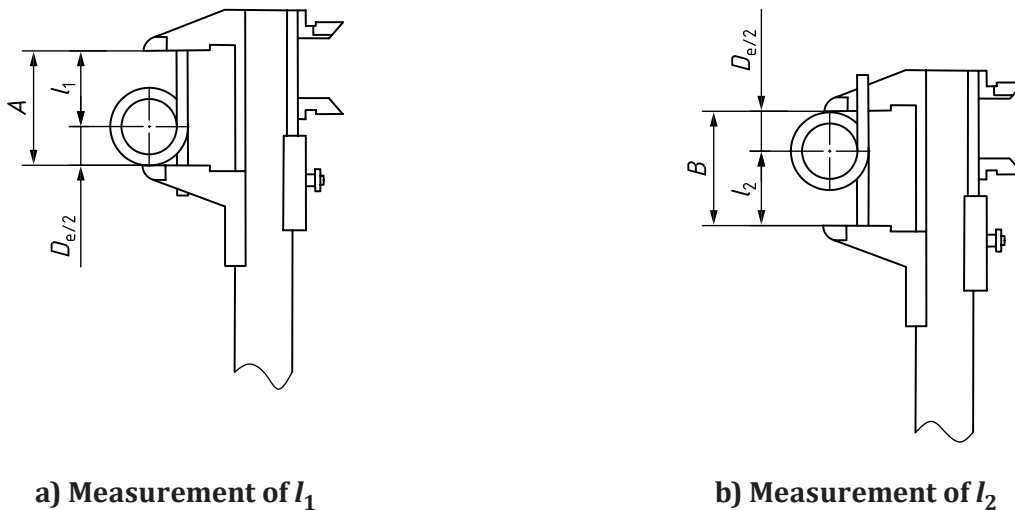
Method of measurement of the spring leg length ( $l$ ) with calliper (examples)
